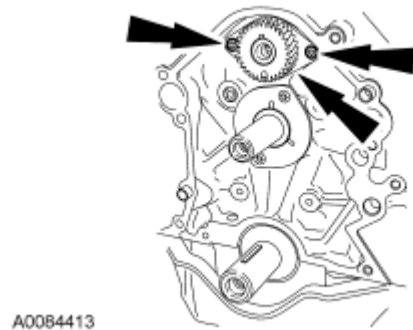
Balance Shaft Driven Gear, Thrust Plate & Bolts
